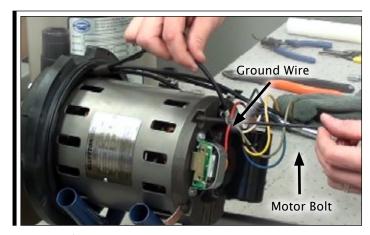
| Install bulkhead ground wire to motor under the motor bolt located to the left of motor lead wire assembly. Tighten the motor bolts using torque wrench in a cross pattern.
